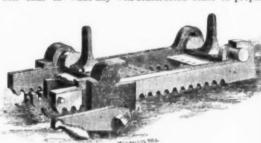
The Clamp Holding the Two Ends of a Belt Ready for Fastening.
